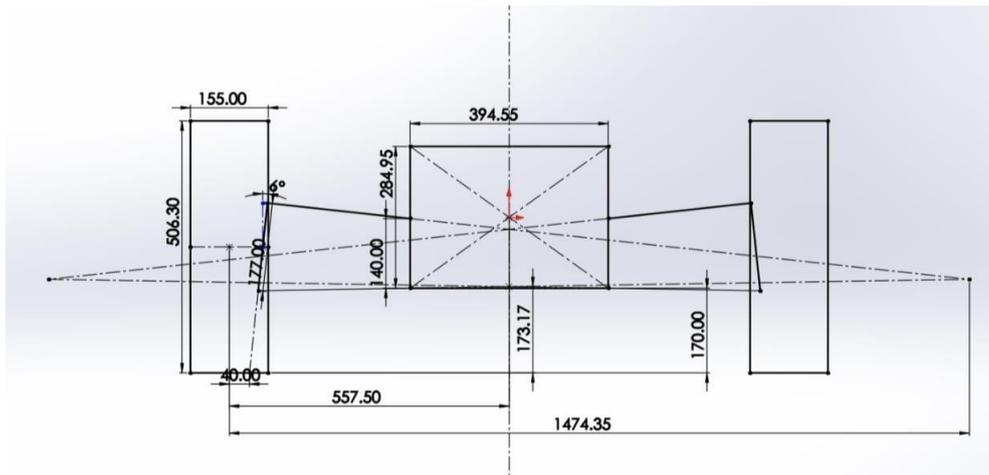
Image of CAD of Front Suspension 2D Geometry
